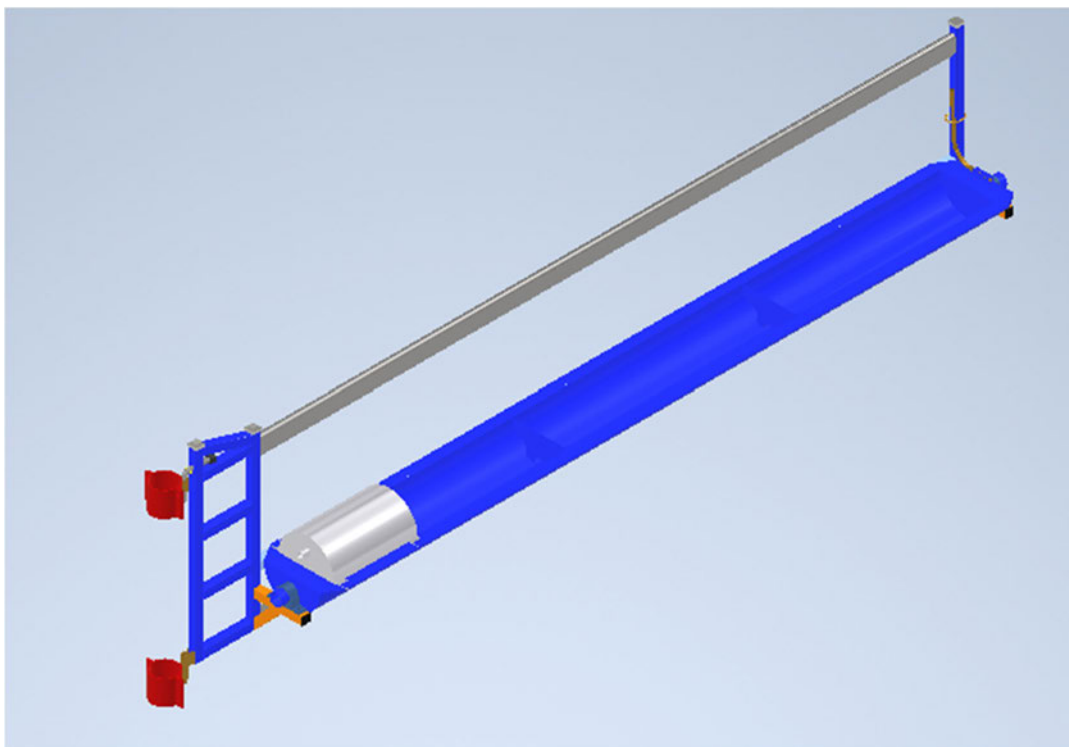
Prototype Design – Trough body & Float hood assembly, isometric view
